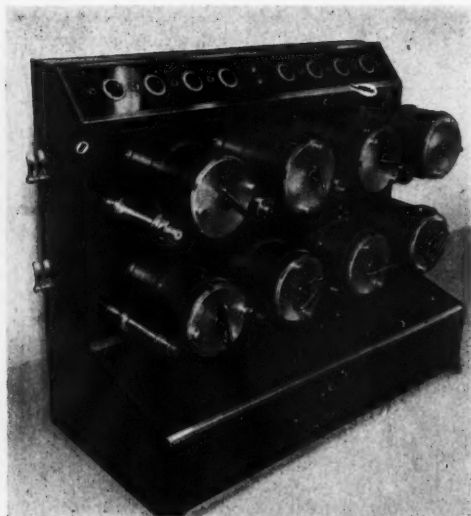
Paterex, Ltd., have built this multiple-barrel finishing machine to meet their particular requirements for handling fairly large batches of small components. The barrels can be removed from the machine for loading and unloading workpieces, and are driven individually, under the control of separate timers
